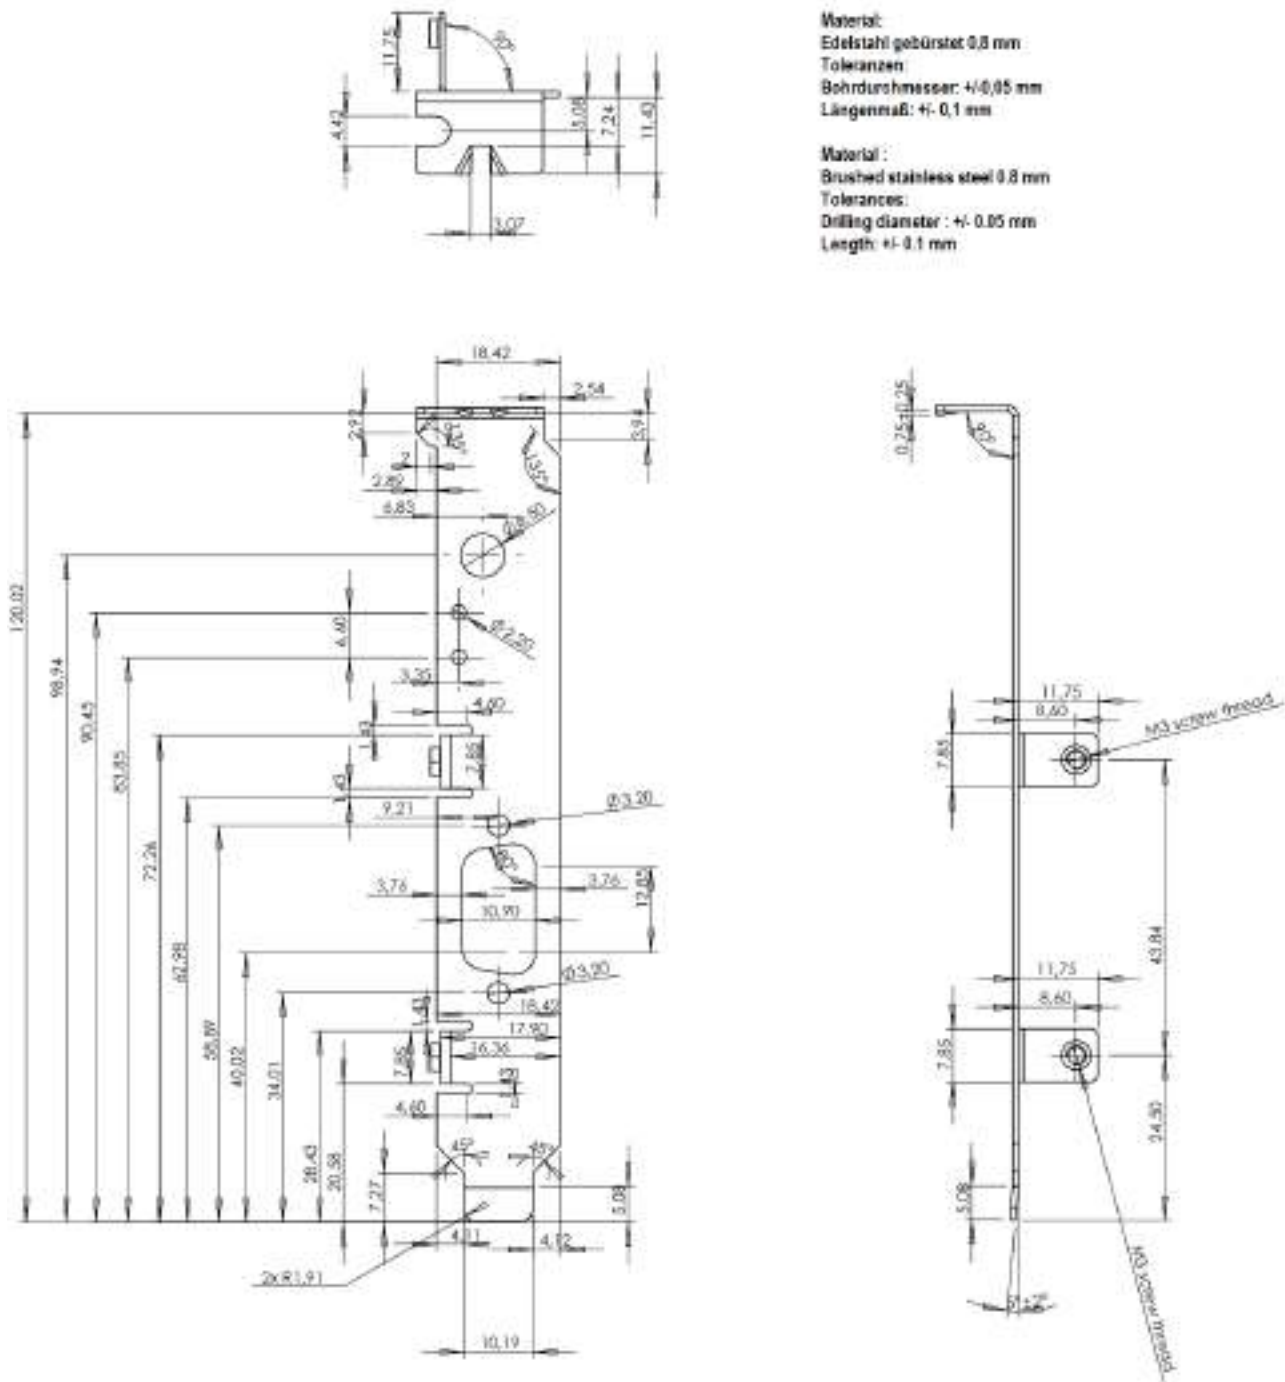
Dimensions Front Panel für CIFX 50-CO or CIFX 50E-CO
